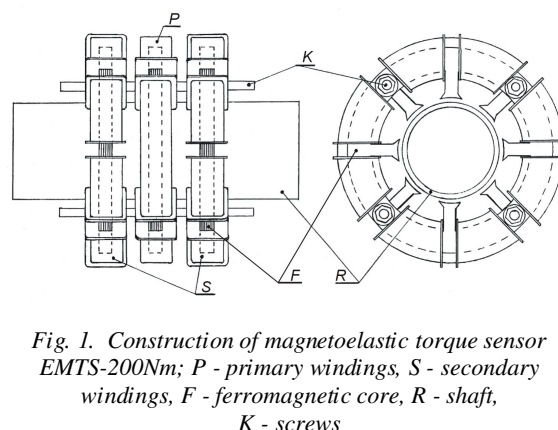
Construction of magnetoelastic torque sensor EMTS-200Nm; P - primary windings, S - secondary windings, F - ferromagnetic core, R - shaft, K - screws
